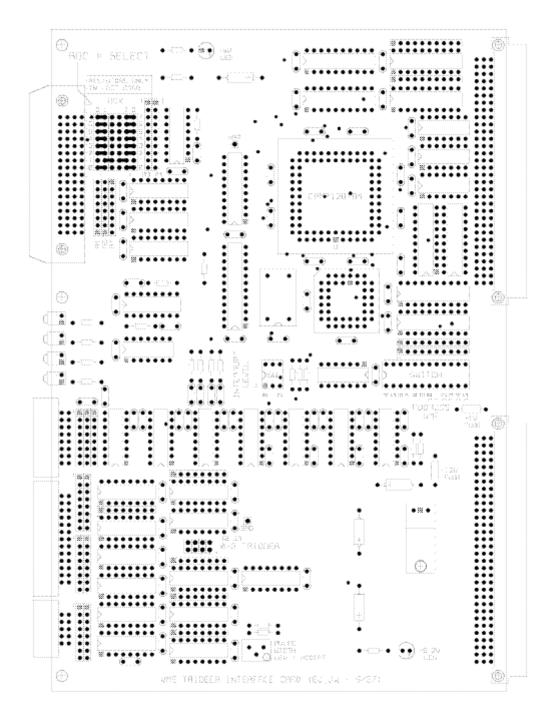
Board layout. Shown is jumper setup for ROC +1.
